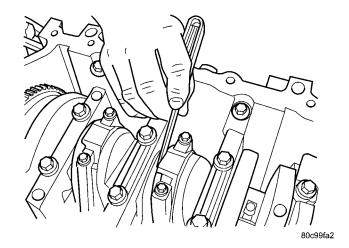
Measuring Connecting Rod Side Clearance STANDARD PROCEDURE - CYLINDER BORE AND PISTON - FITTING
